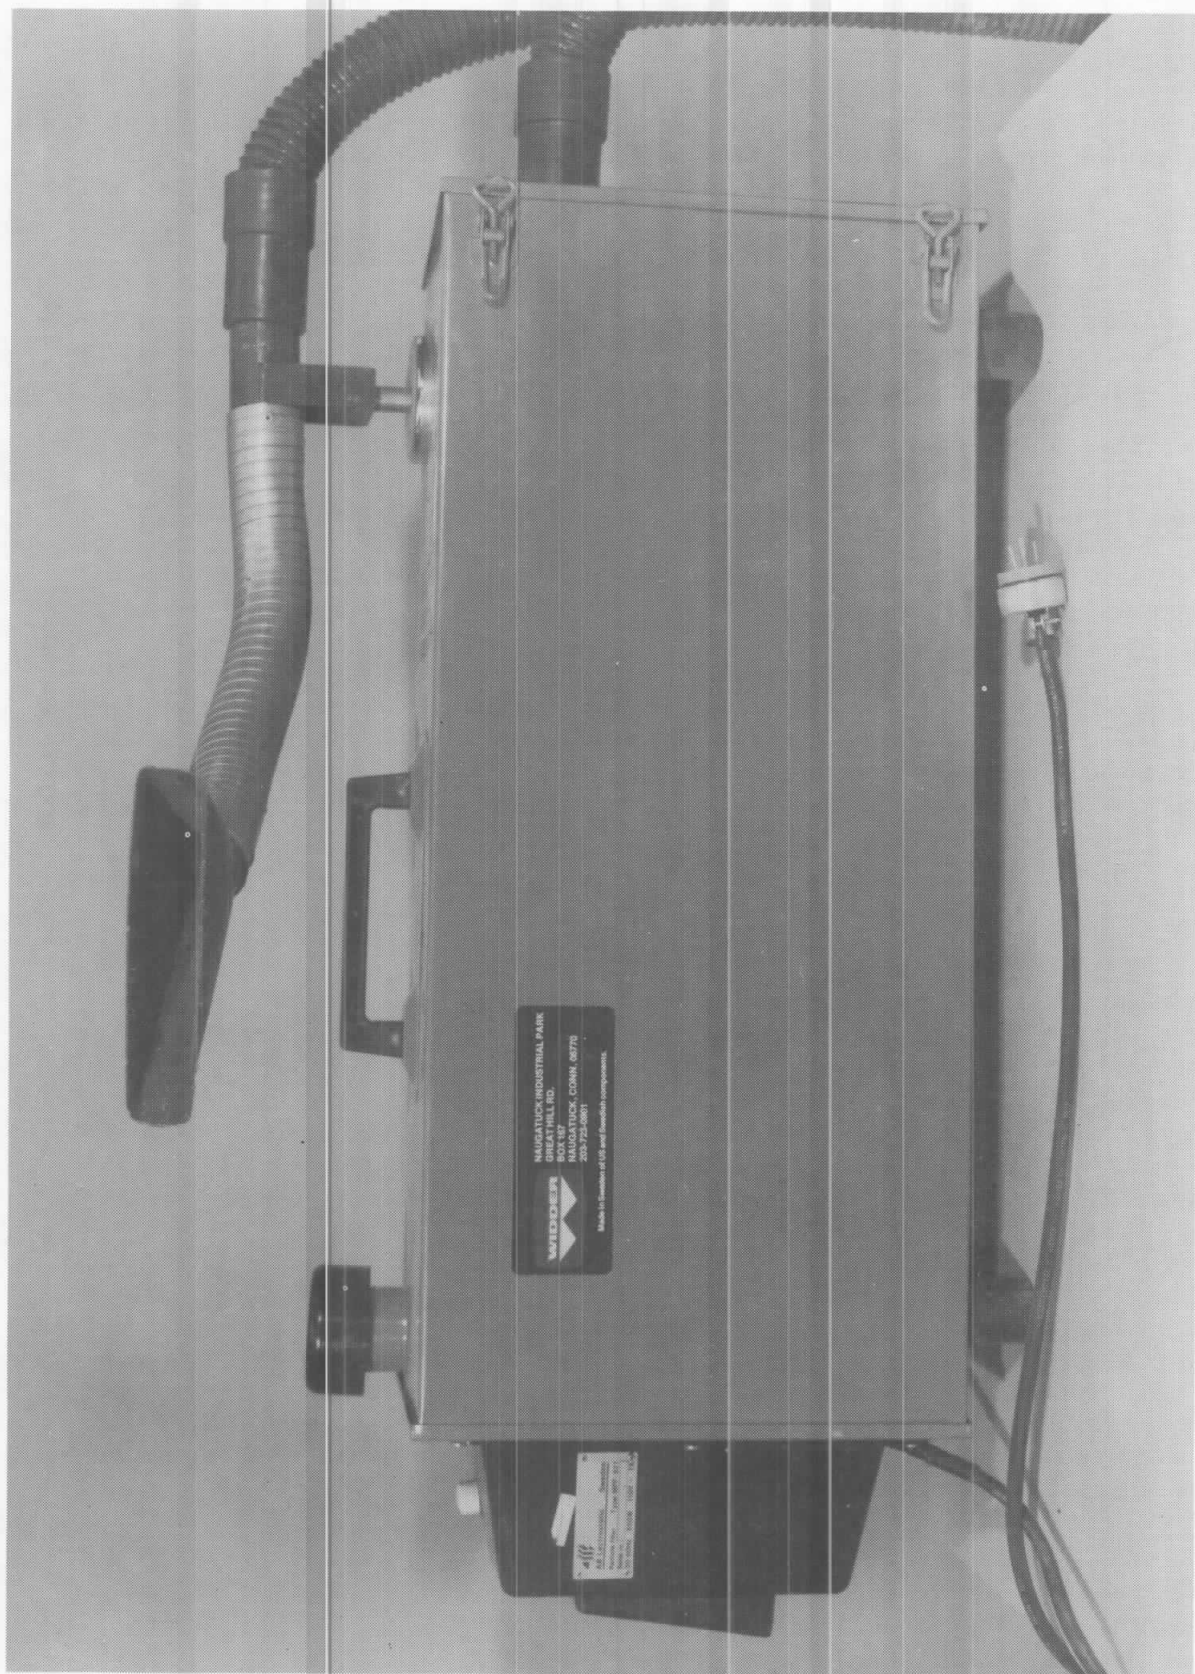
Widdervac welding-exhaust unit with 4-inch nozzle. Overall dimensions: 8 by 18 by 33 inches; weight: 30 pounds.
